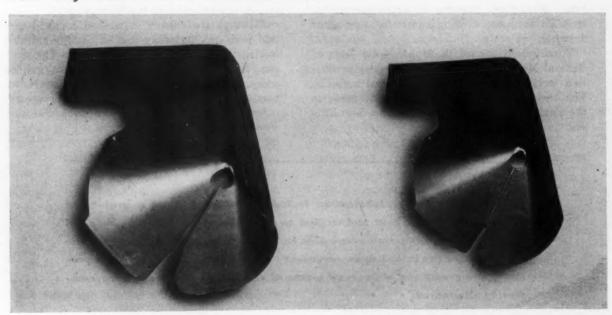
B shows the piece after the straight edges have been welded. Preforming actually brings the edges together but the springback forces them apart. Preforming gives the blank a somewhat conical shape. The holes at either side of the weld area locate over pins in the welding fixture, bringing the two straight edges together.
